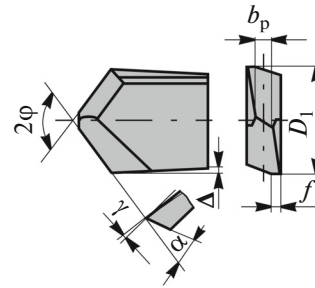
Geometric parameters of the core flat drill cutting section (in plane sharpening).
